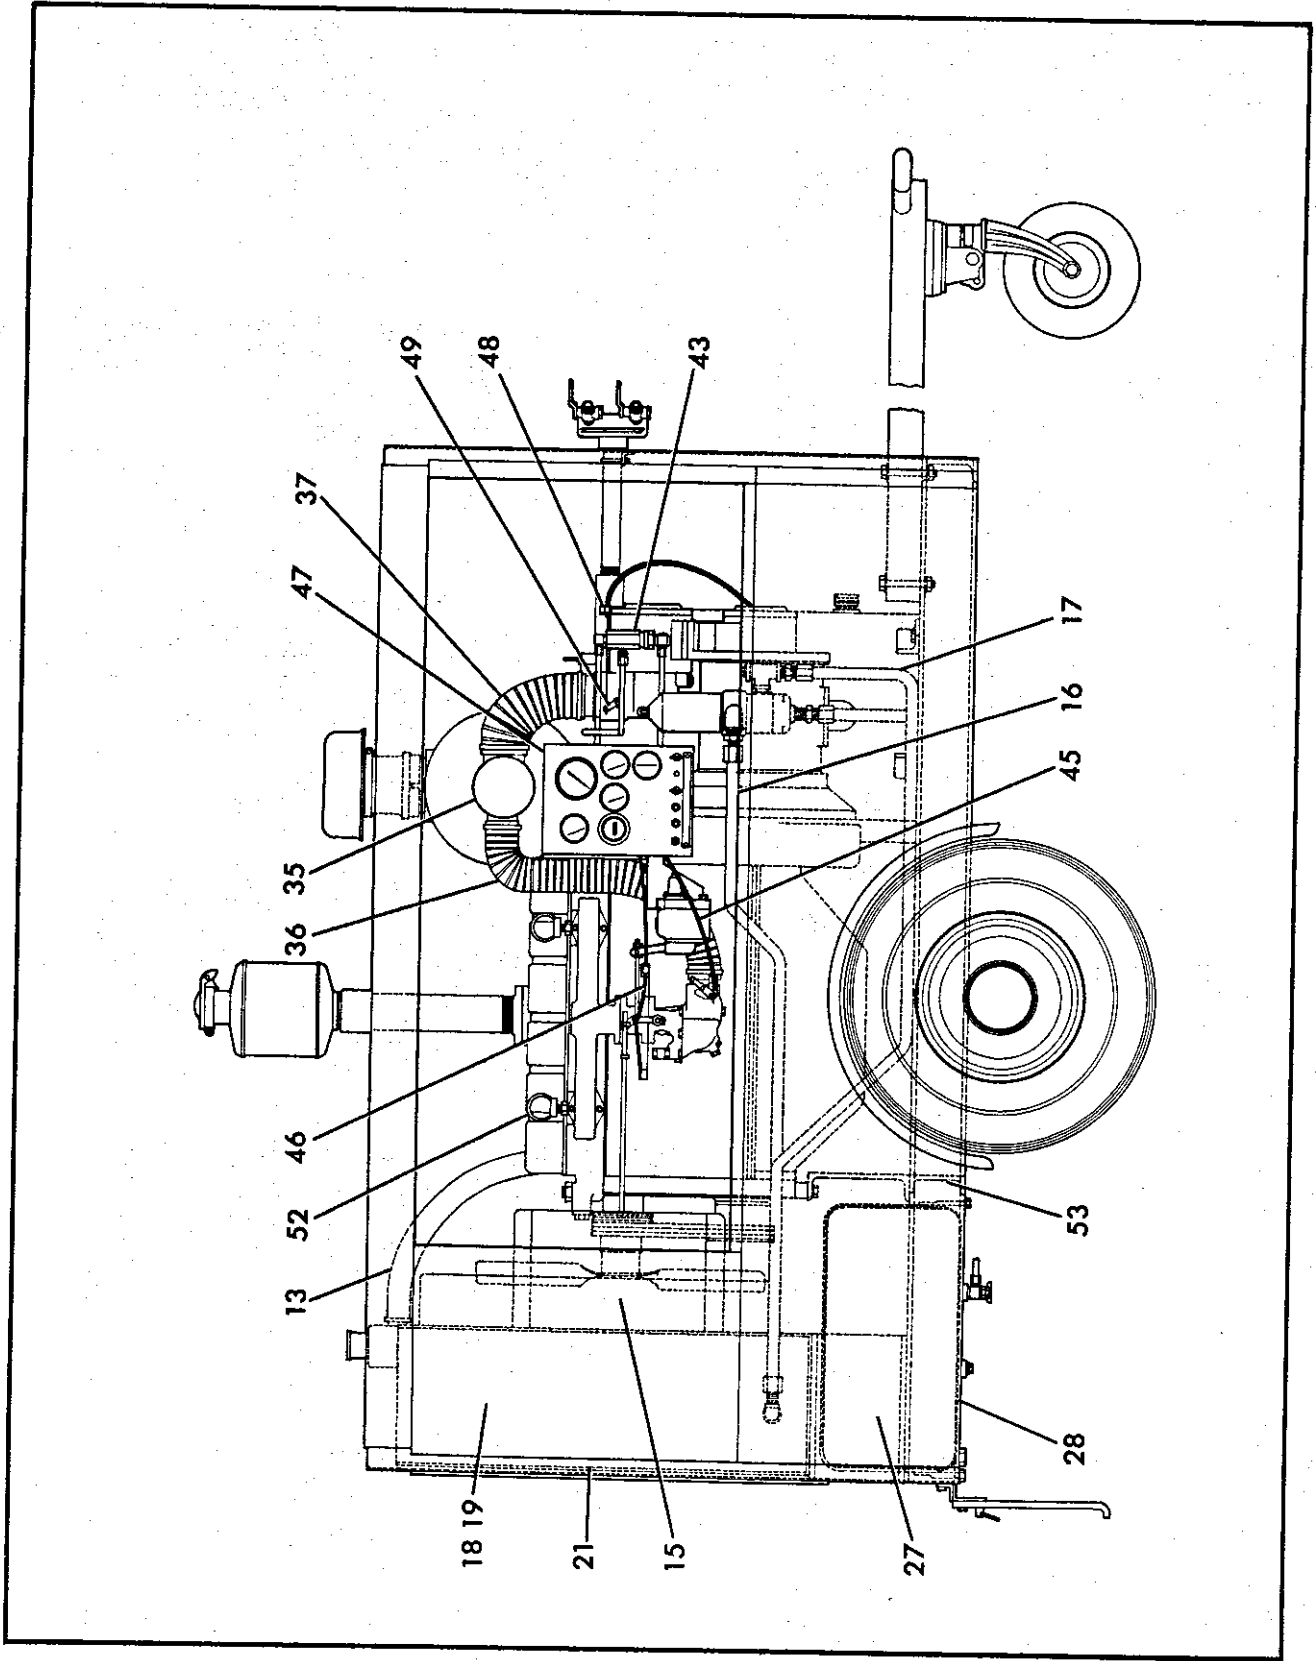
Unit Assembly (Sheet 2 of 3)
